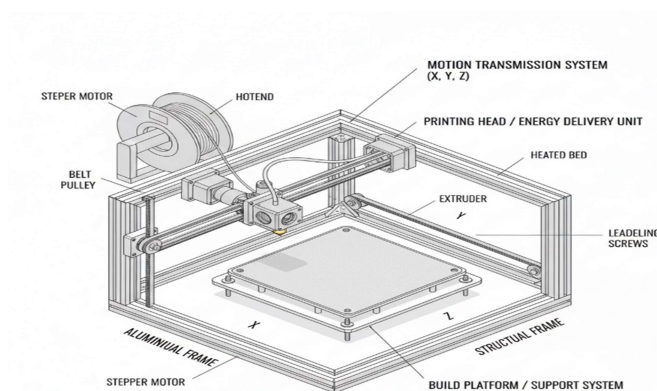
Schematic Diagram of a Typical 3D Printing Machine
